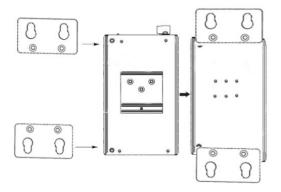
Schematic diagram of industrial machine guide rail disassembly
